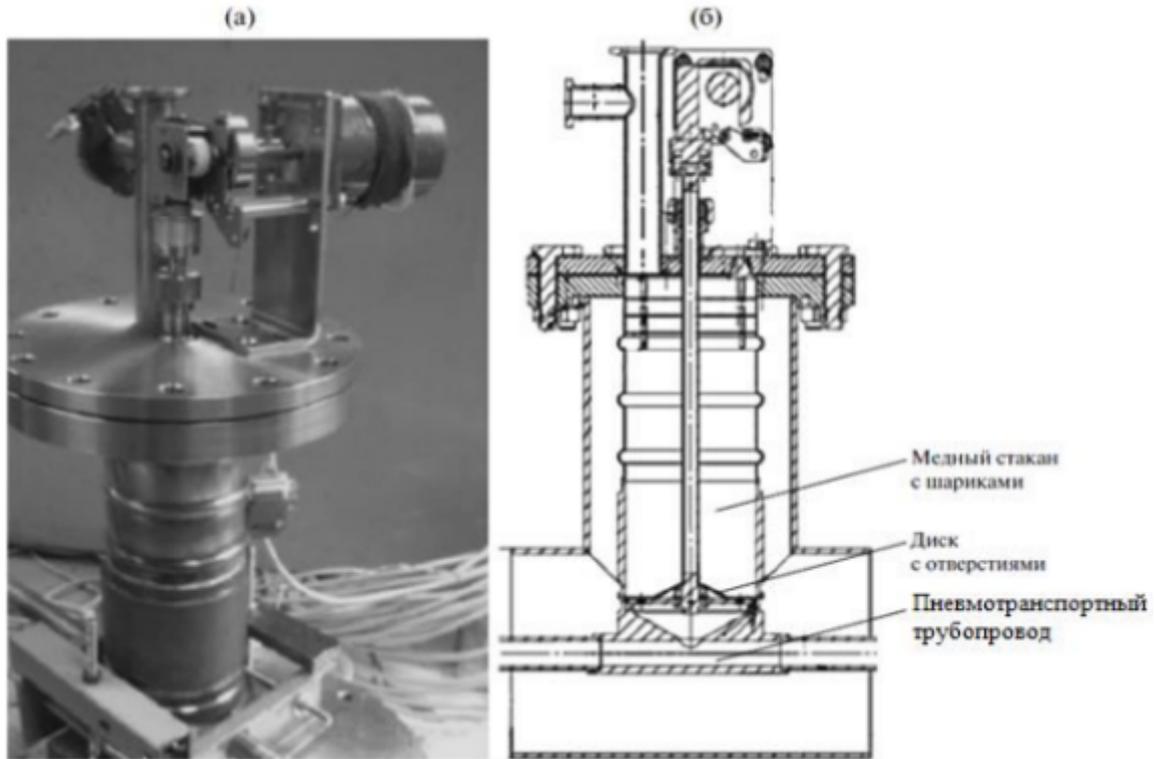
Dispenser: a) copper cup with balls, b) drawing version
